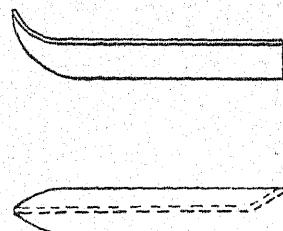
Elevation and Plan of T-iron Bracket for Pipes.
